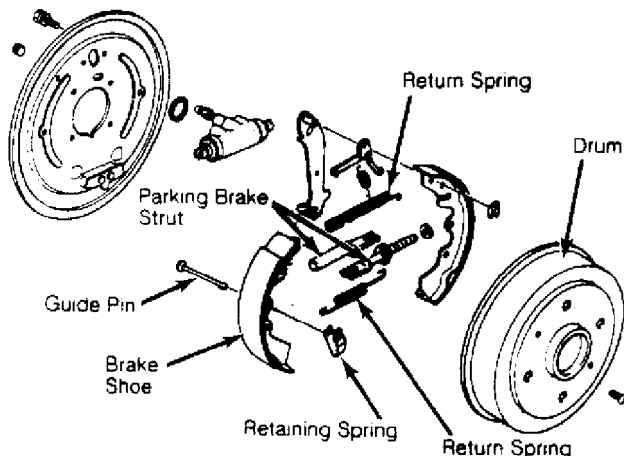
Exploded View of GLC Wagon Rear Brakes
